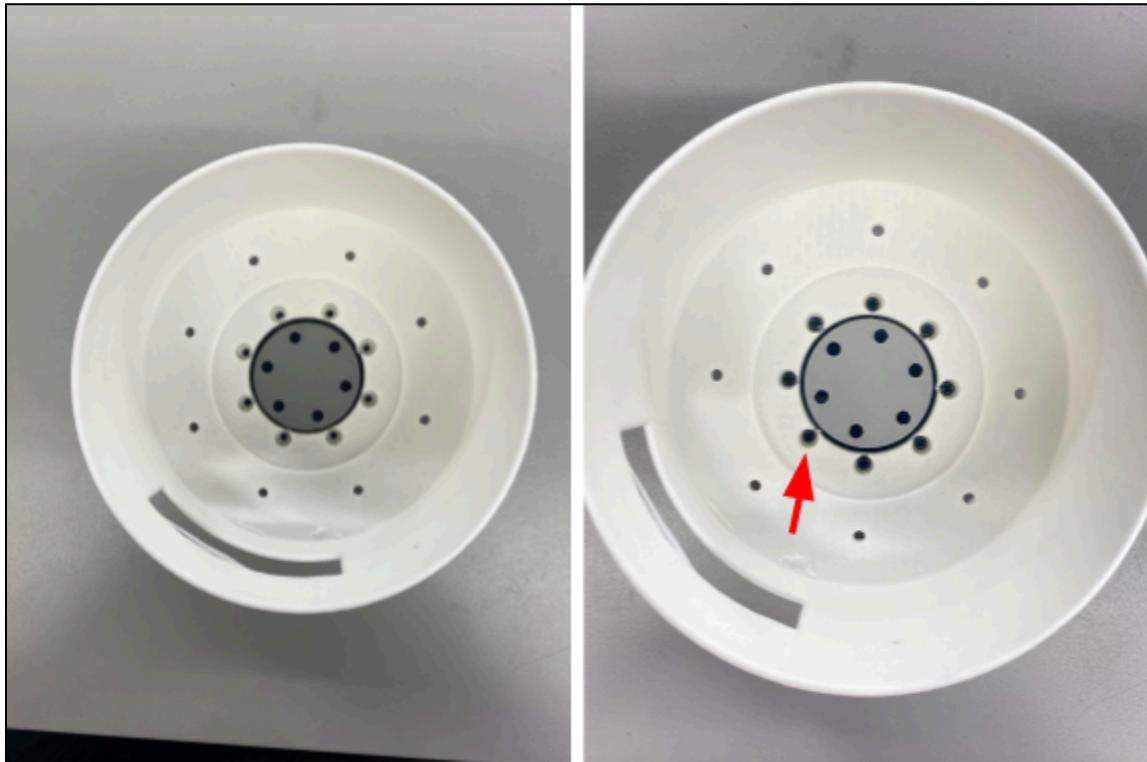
J4 Motor Cover to J4 Mushroom Cap
